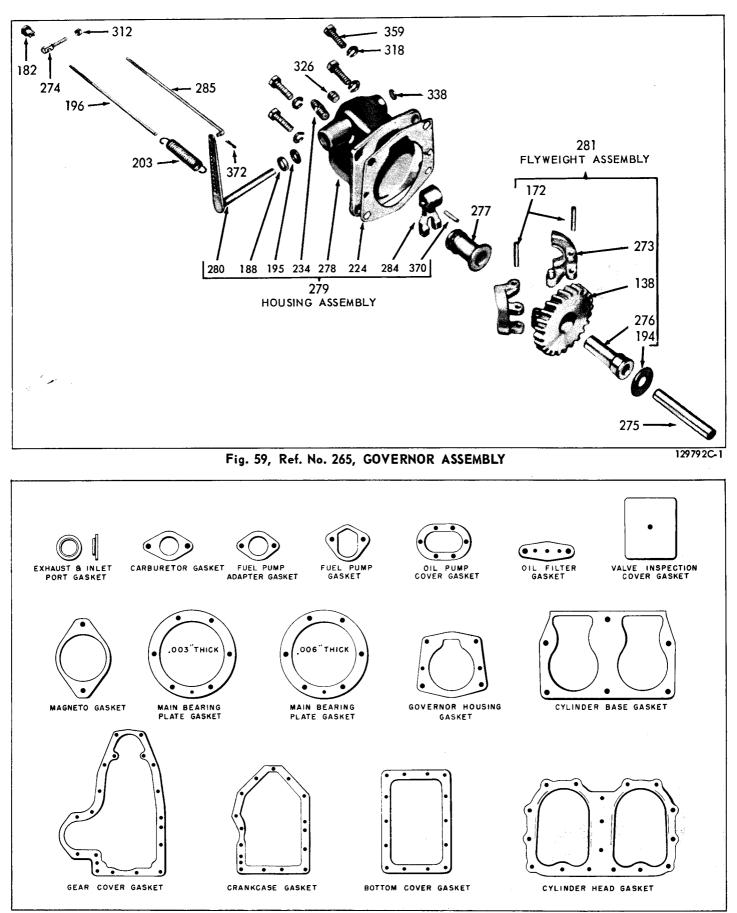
, Ref. No. 208, GASKET SET Parts are identified by reference number. See parts list for correct part number.
